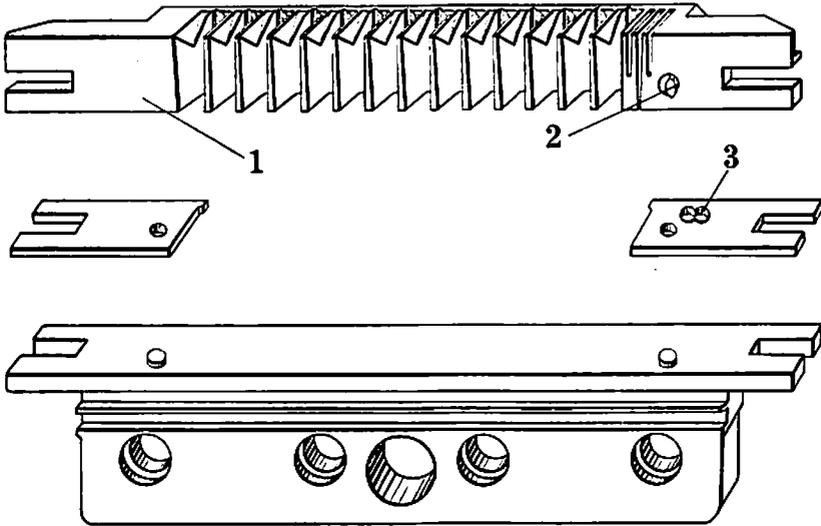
View of the Old-Style Recessed Mold. Left-hand liners of different lengths can be used with this type of mold, making it possible to obtain large slugs of varying lengths, including half-em measures. This is accomplished by the use of an elliptical dowel 2 in the mold cap 1. The dowel fits into either of two intersecting holes 3 in the right-hand liner, enabling the operator to shift the mold cap from one position to another in order to align the ribs in the mold cap with the ends of the liners.
